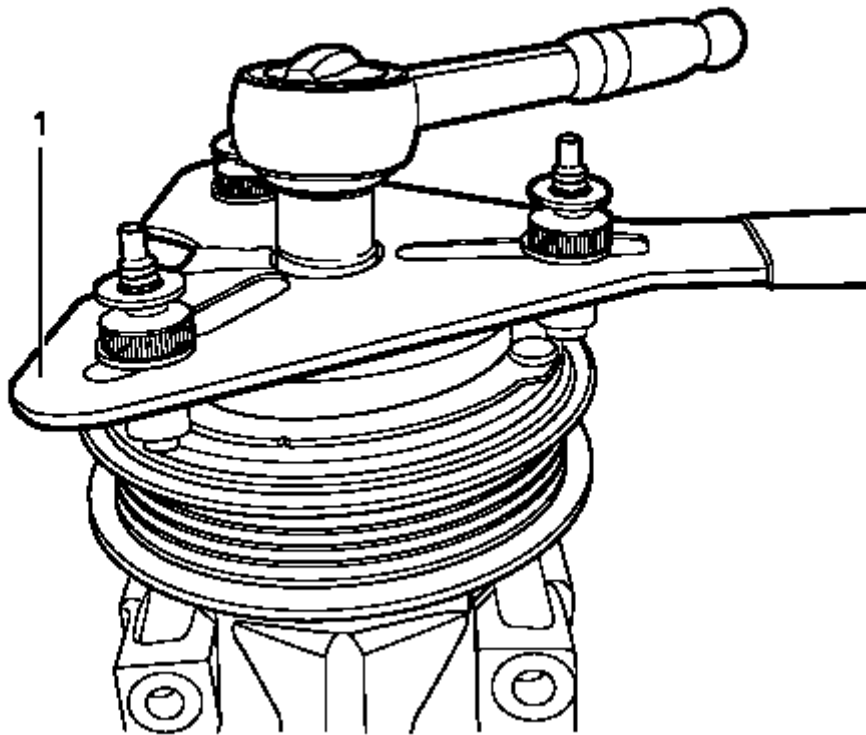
Identifying GE-48965 Clutch Plate Holder
